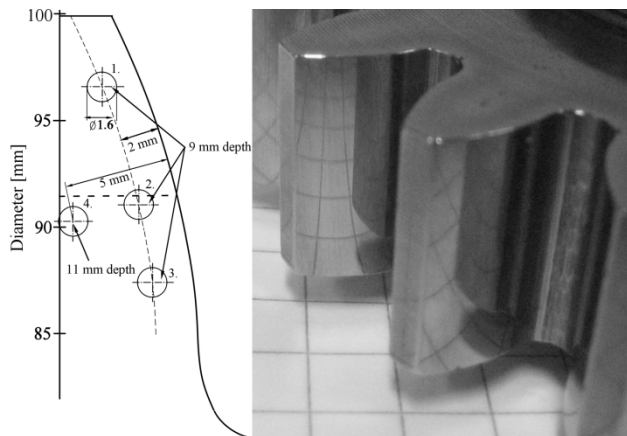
Position of the k-thermocouple in the test gears and the surface of the polished gear
